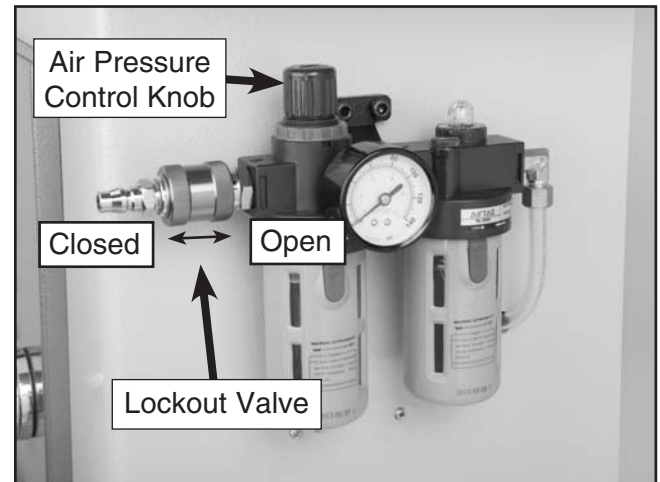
Filter/lubricator/regulator located on the left-hand side of the cabinet.
